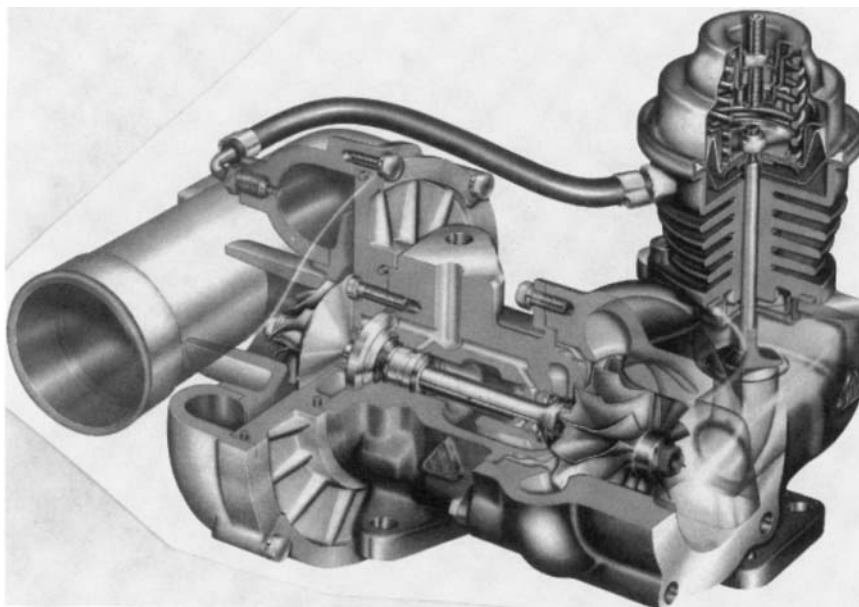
Turbocharger fitted with an integral boost pressure control valve. Boost pressure sensed in the discharge outlet from the compressor is transmitted via the tubing to the diaphragm side of the control valve. When boost pressure exceeds the spring force, the poppet valve is opened so a portion of the exhaust gas bypasses the turbine. (Courtesy Kuhnle, Kopp & Kausch AG.)
